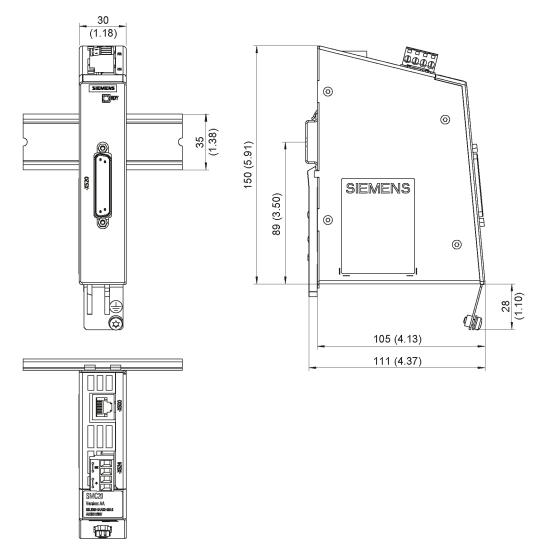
Dimension drawing of the Sensor Module Cabinet SMC20, all data in mm and (inches)
